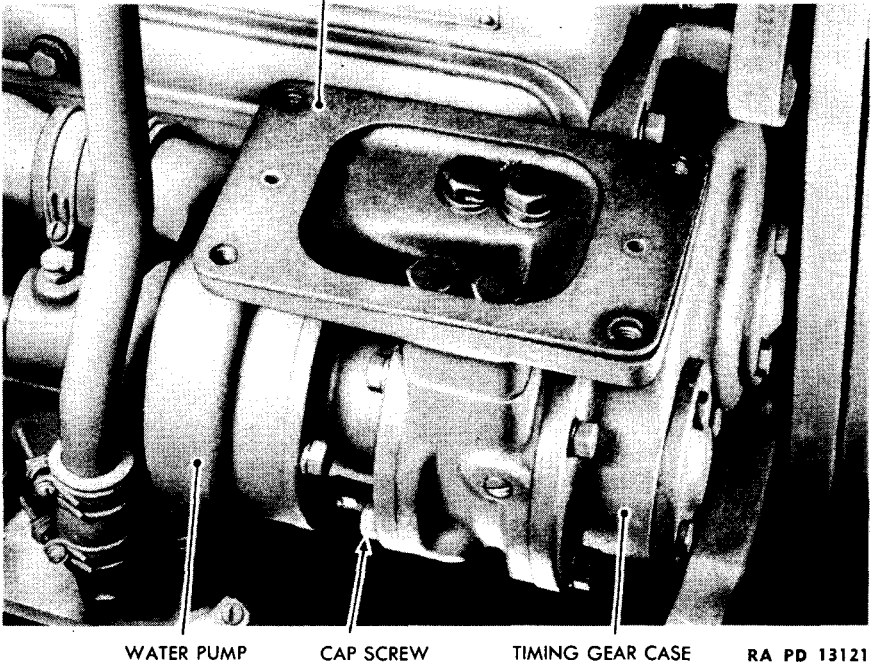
Water Pump, Installed - (Hercules Diesel)
